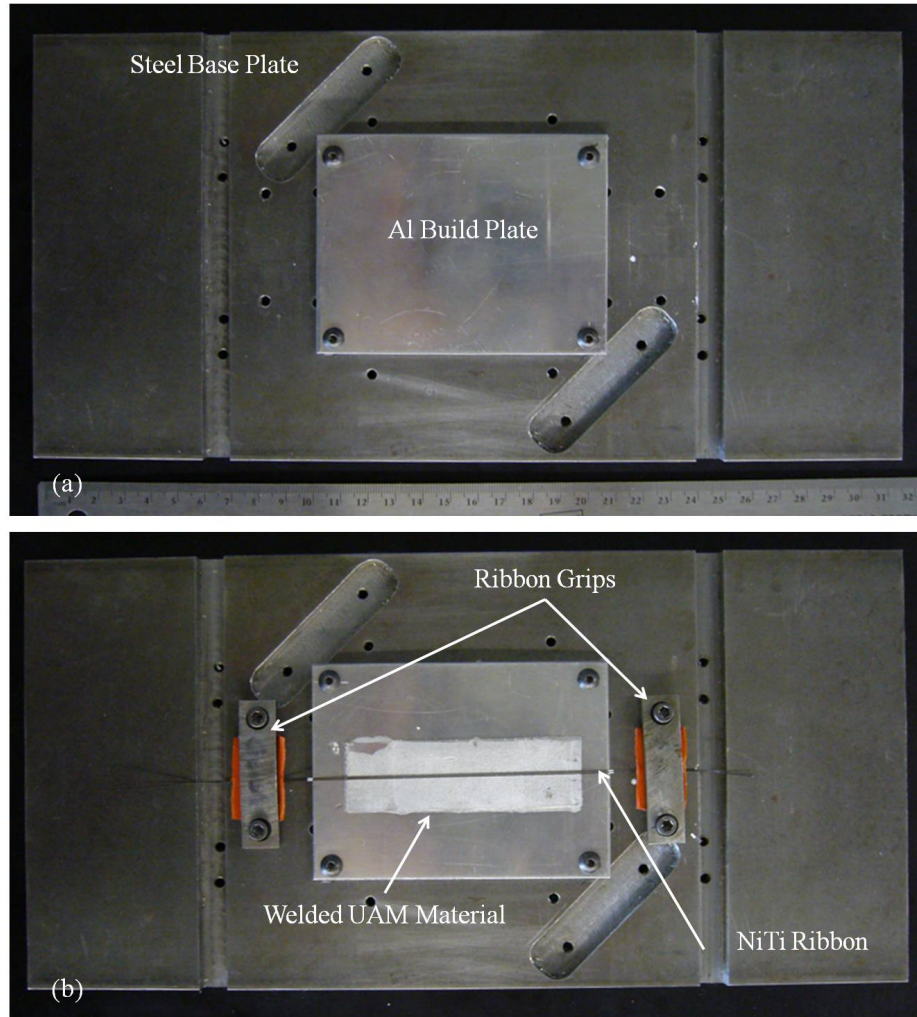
(a) Al 3003-H14 build plate attached to steel base plate used for fabricating the HPUAM NiTi-Al composites. (b) NiTi ribbons clamped in place on top of previously welded tape layers.
